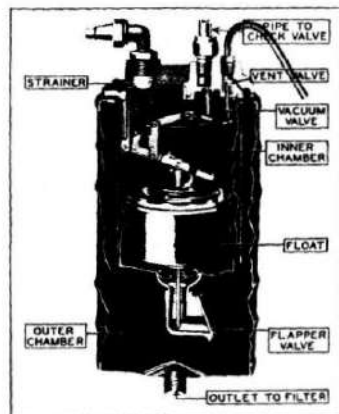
Sectional view of vacuum tank. There is a check valve in the connection to the intake header which prevents back-flow when the vacuum of the header is less than that of the pump.
